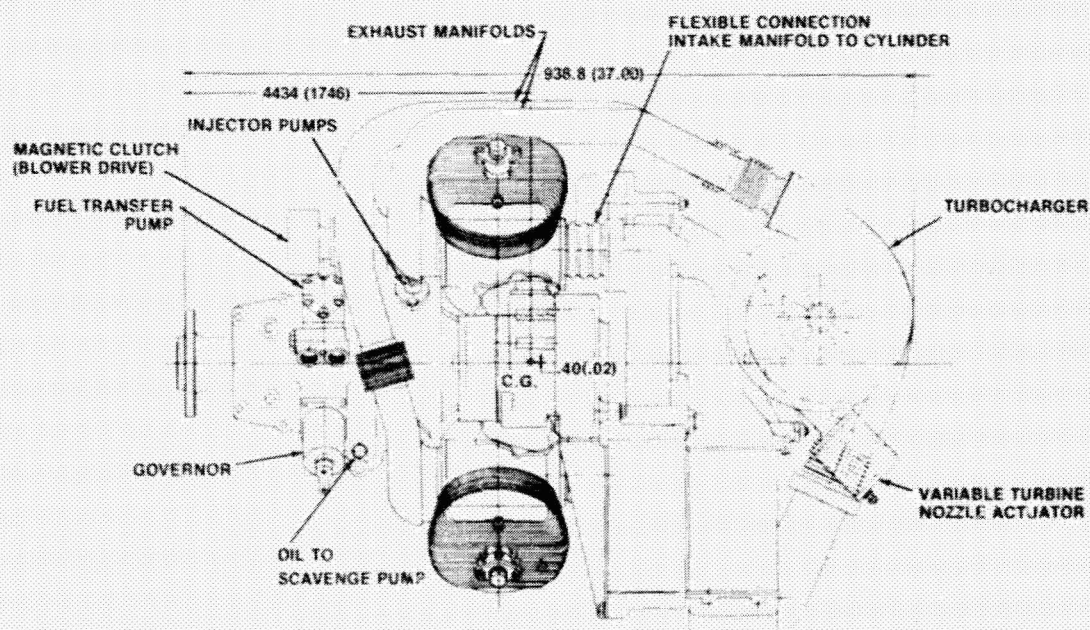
149 kW AIRCRAFT DIESEL — SIDE VIEW
